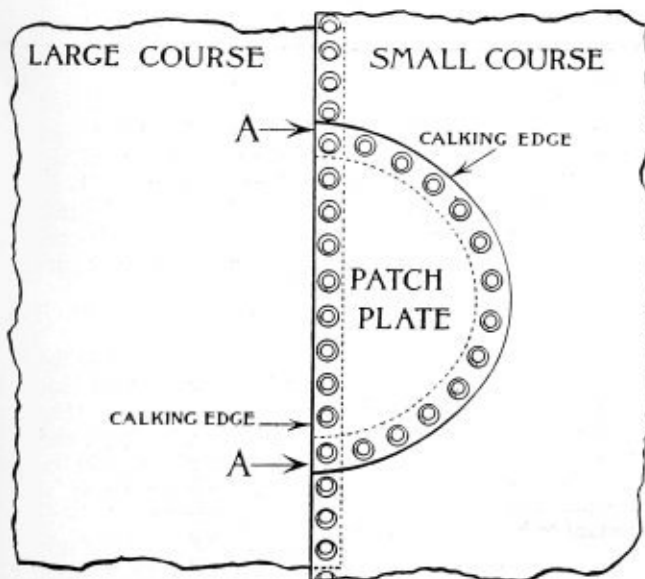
Showing a hard patch applied to inside course of horizontal boiler
